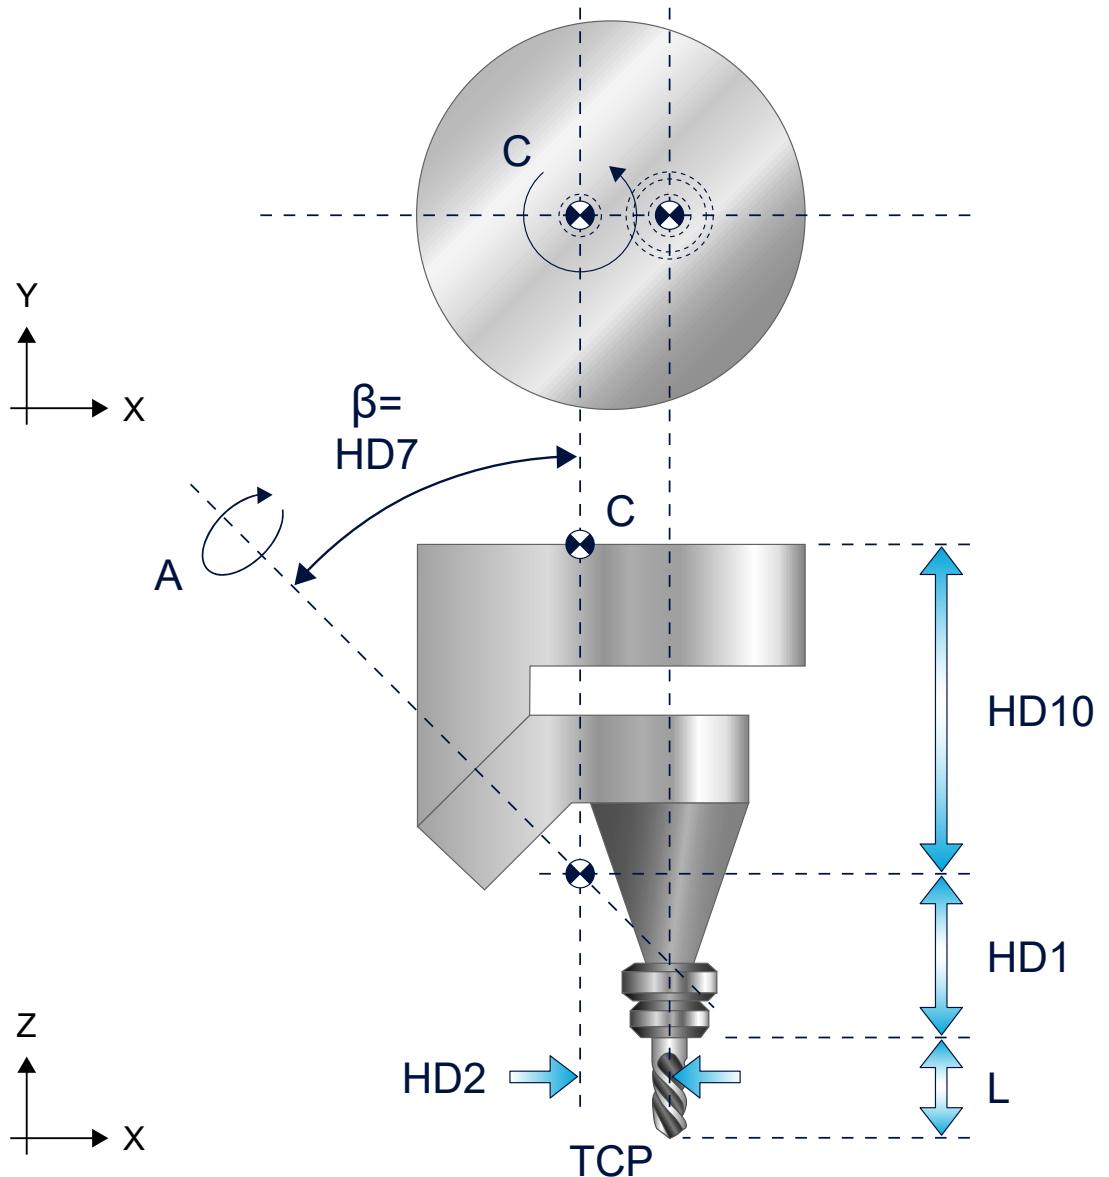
Cardanic head with offset C axis (C axis not located in tool axis)
